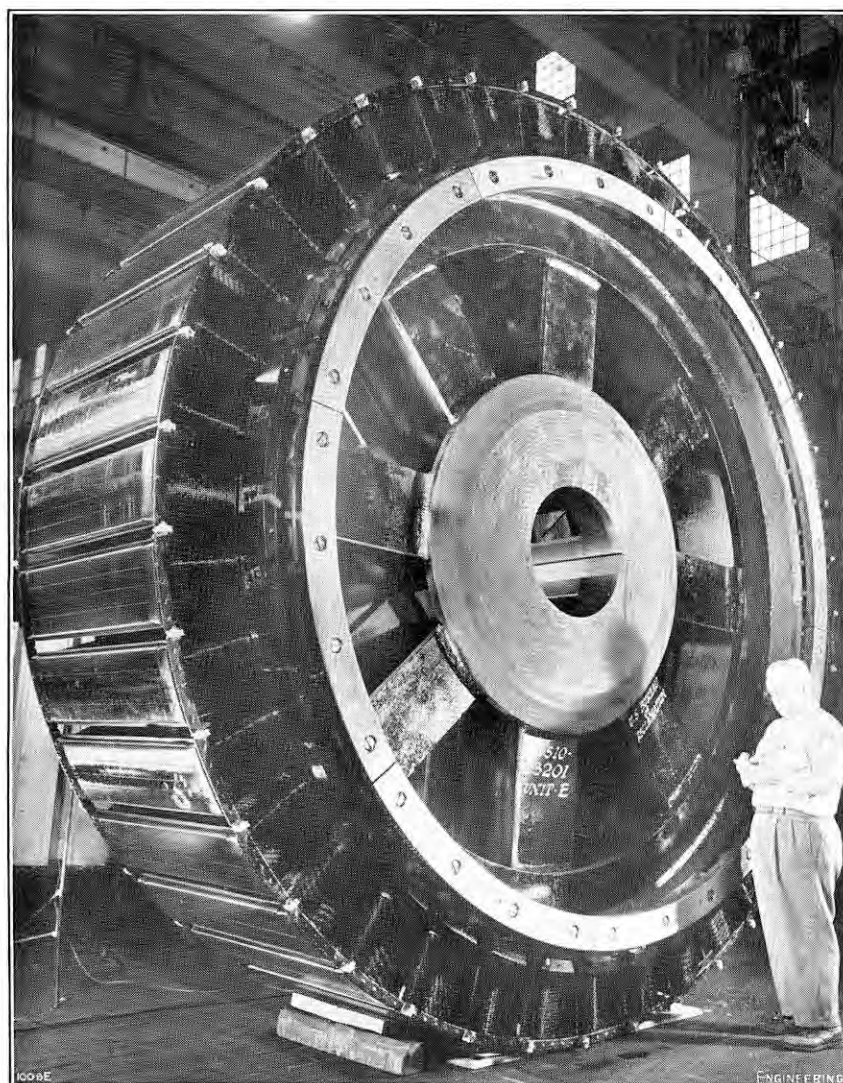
COMPLETED ROTOR FOR MOTOR.
